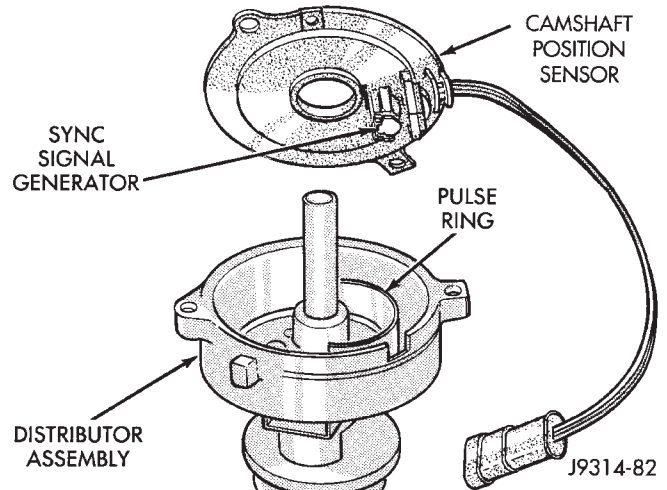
Camshaft Position Sensor—Typical(5.2L/5.9L Distributor Shown)
